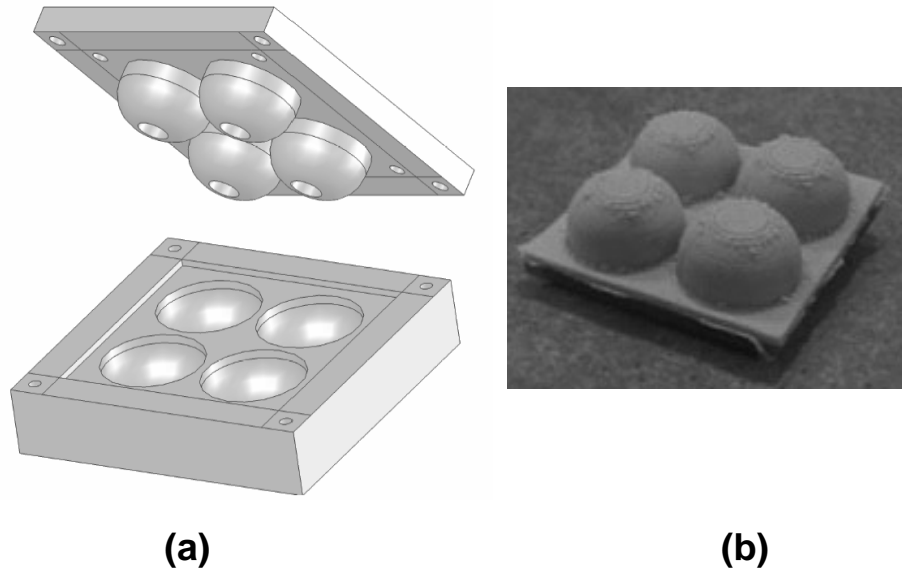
(a) CAD rendering of the mold used to build 4 sensors. The dimensions were chosen to fit the fingers of the robot OBRERO. (b) Four domes molded using silicon rubber.
